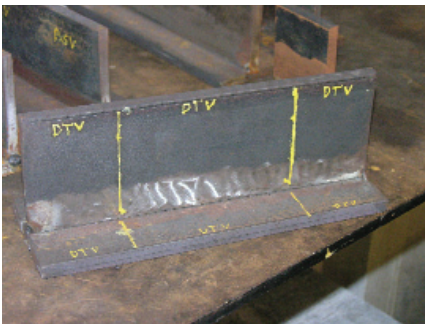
Location of test specimen on 1/2-in.-thick fillet weld test plate.
